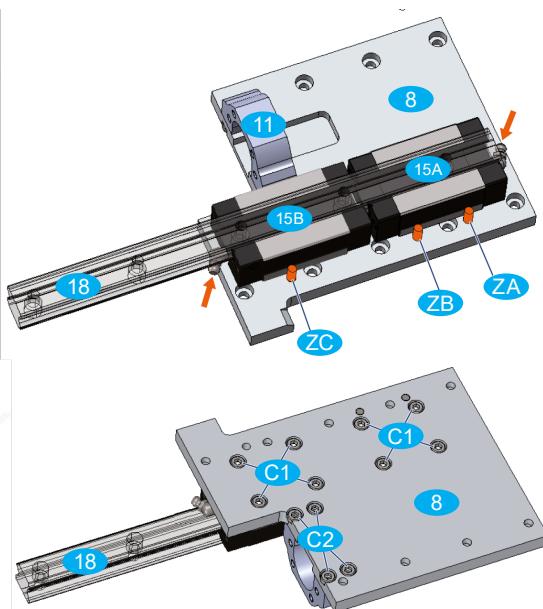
Assembly of the Z-axis carriage. Red arrows show the location of the grease nipples.
